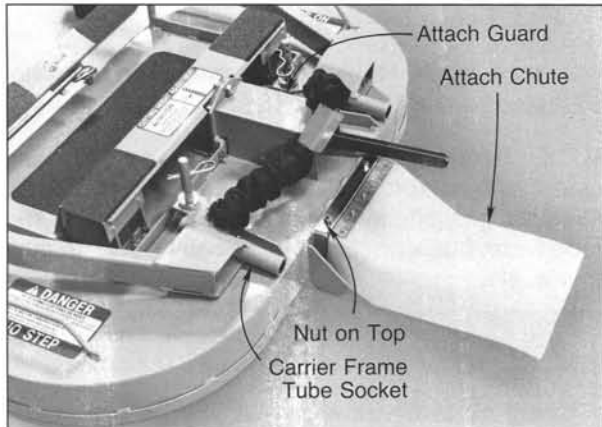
Assembly of Discharge Chute & PTO Shaft Guard on Rear Discharge Deck
